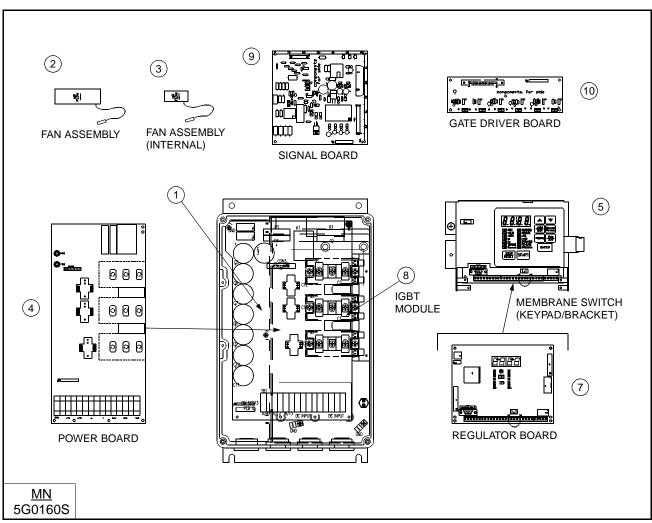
Solar Turbine 5 HP Drive Component Locations
